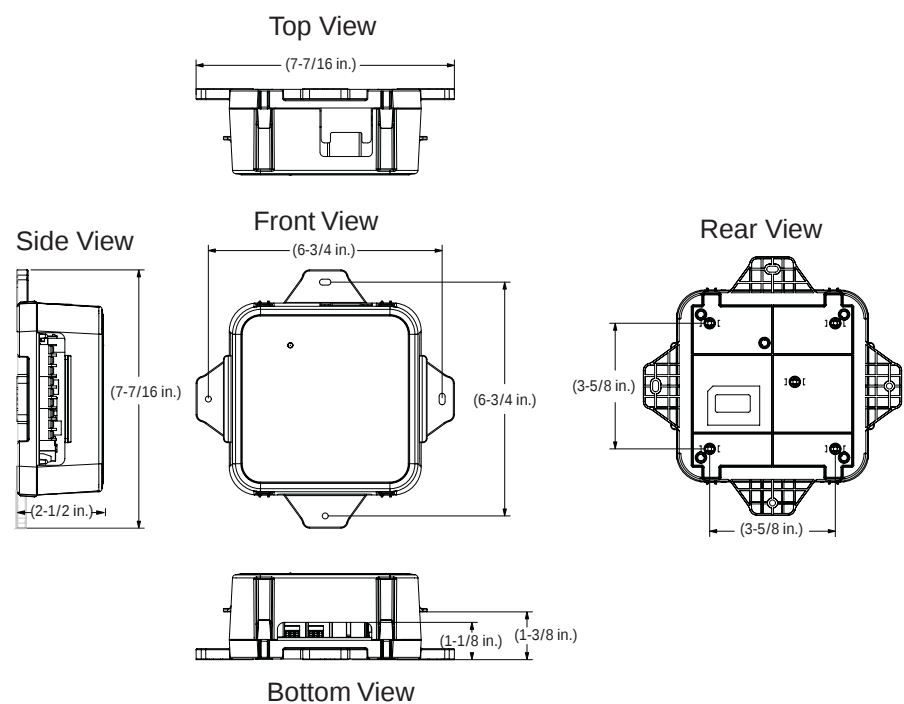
RDS Non-Communicating Blower Control Board Dimensions
